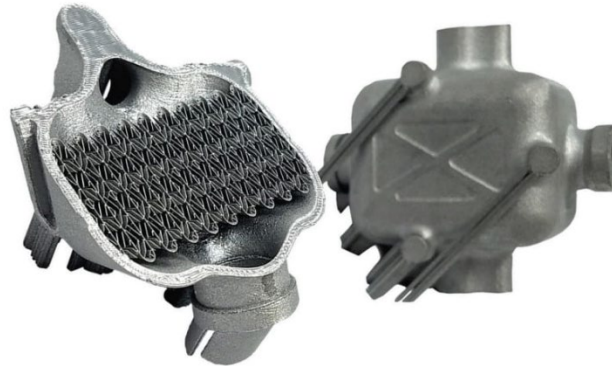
Two views of 3D-printed heat exchangers: cross-section (left) and top view (right) [2].
